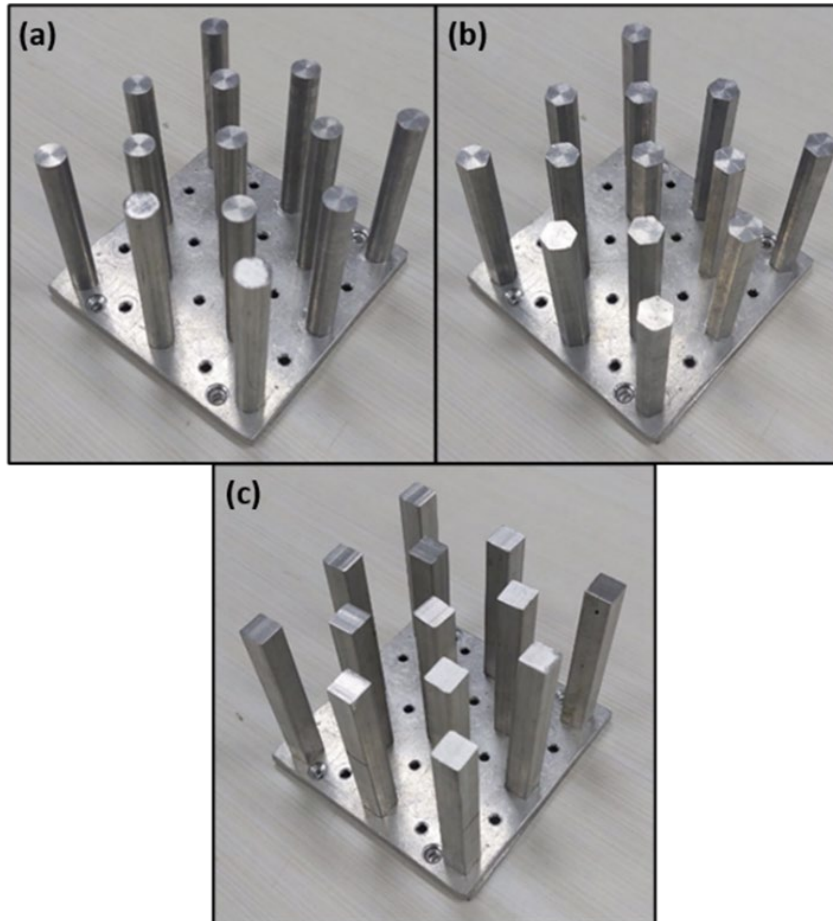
Heat sink assembly with different cross-section profile geometry (a) Circular; (b) Hexagonal; and (c) Square
